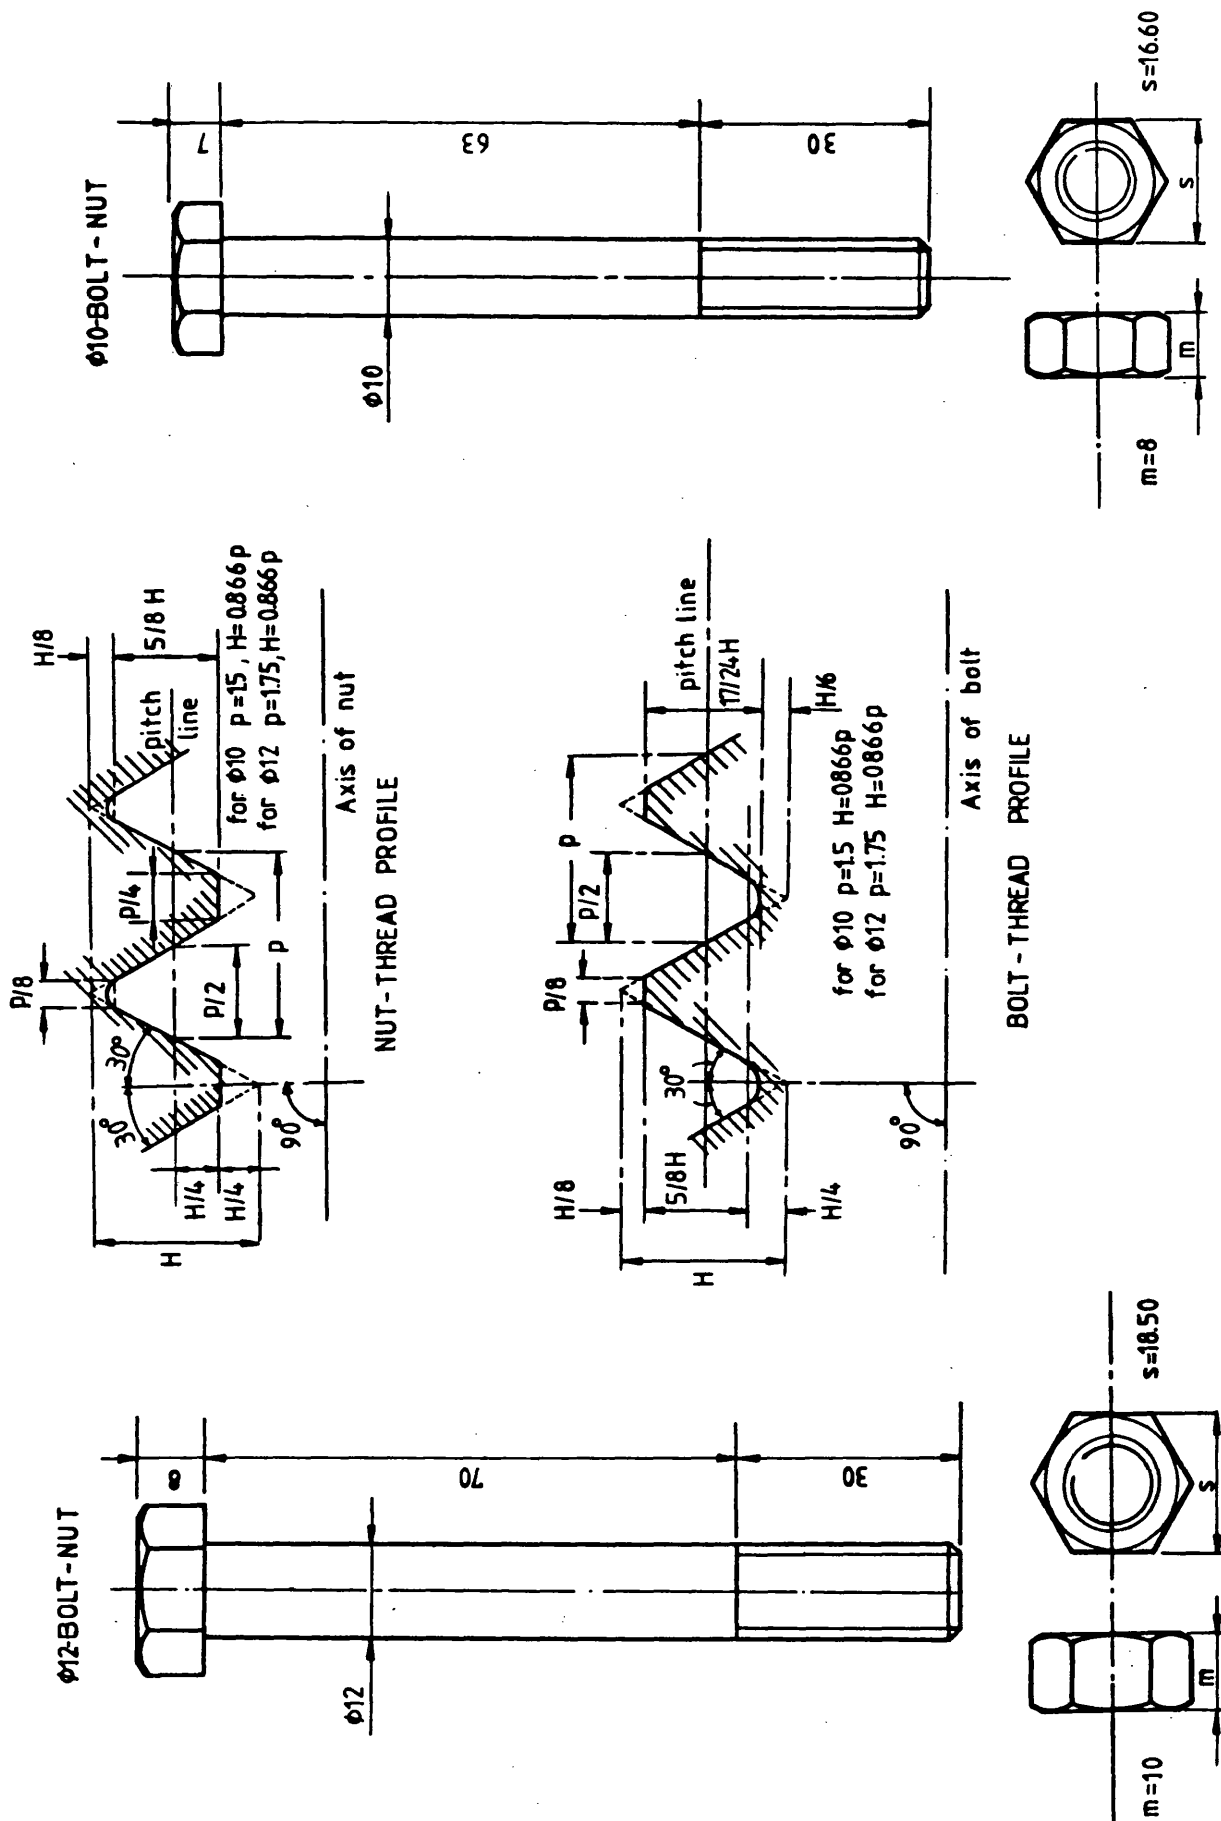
DETAILS OF GEOMETRY OF BOLTS
